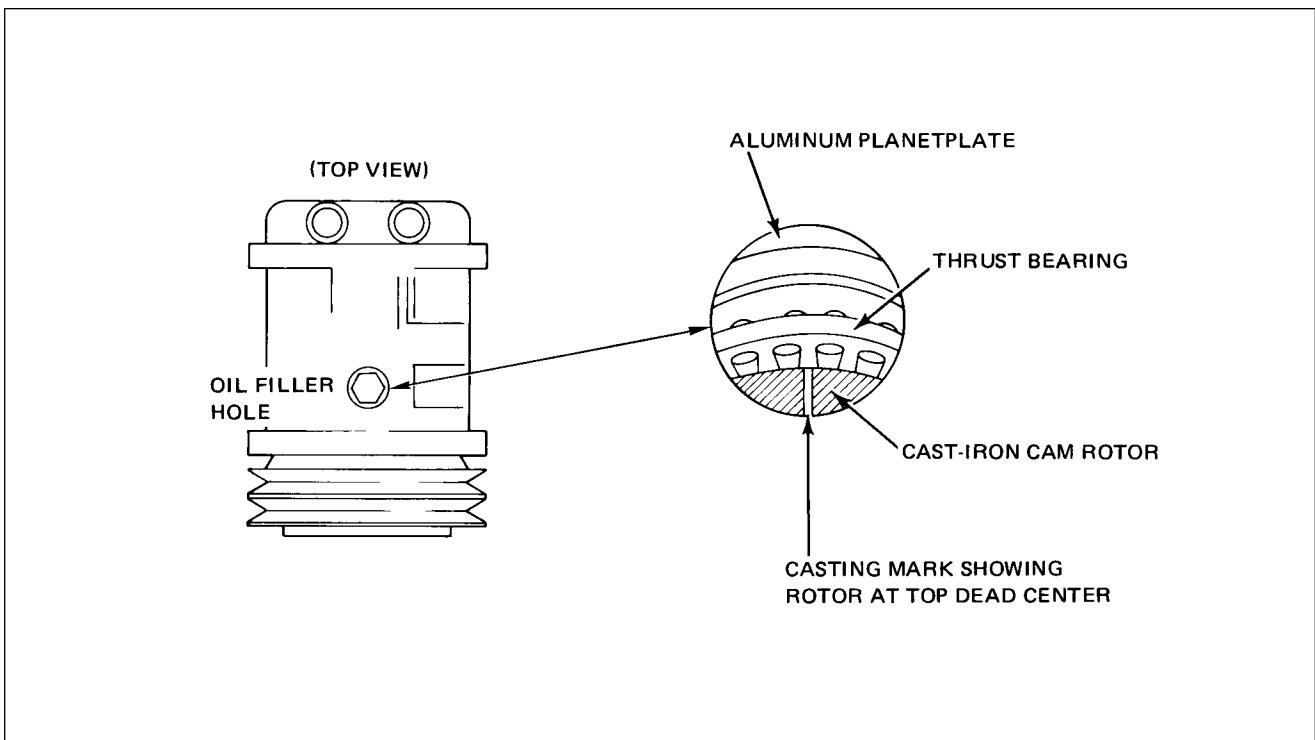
Top Dead Center Casting Mark (Sankyo Compressor)
